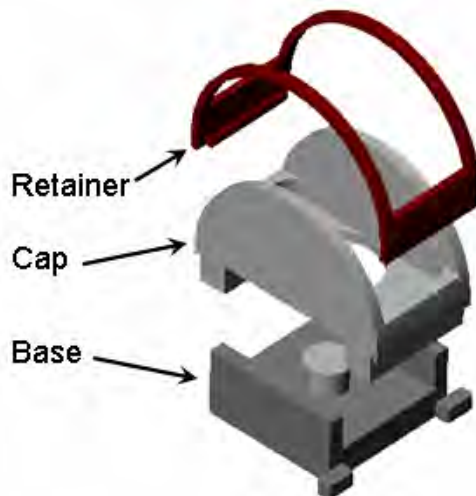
Exploded Schematic View of the XRD Sample Holder (Kapton[®] film not shown)
